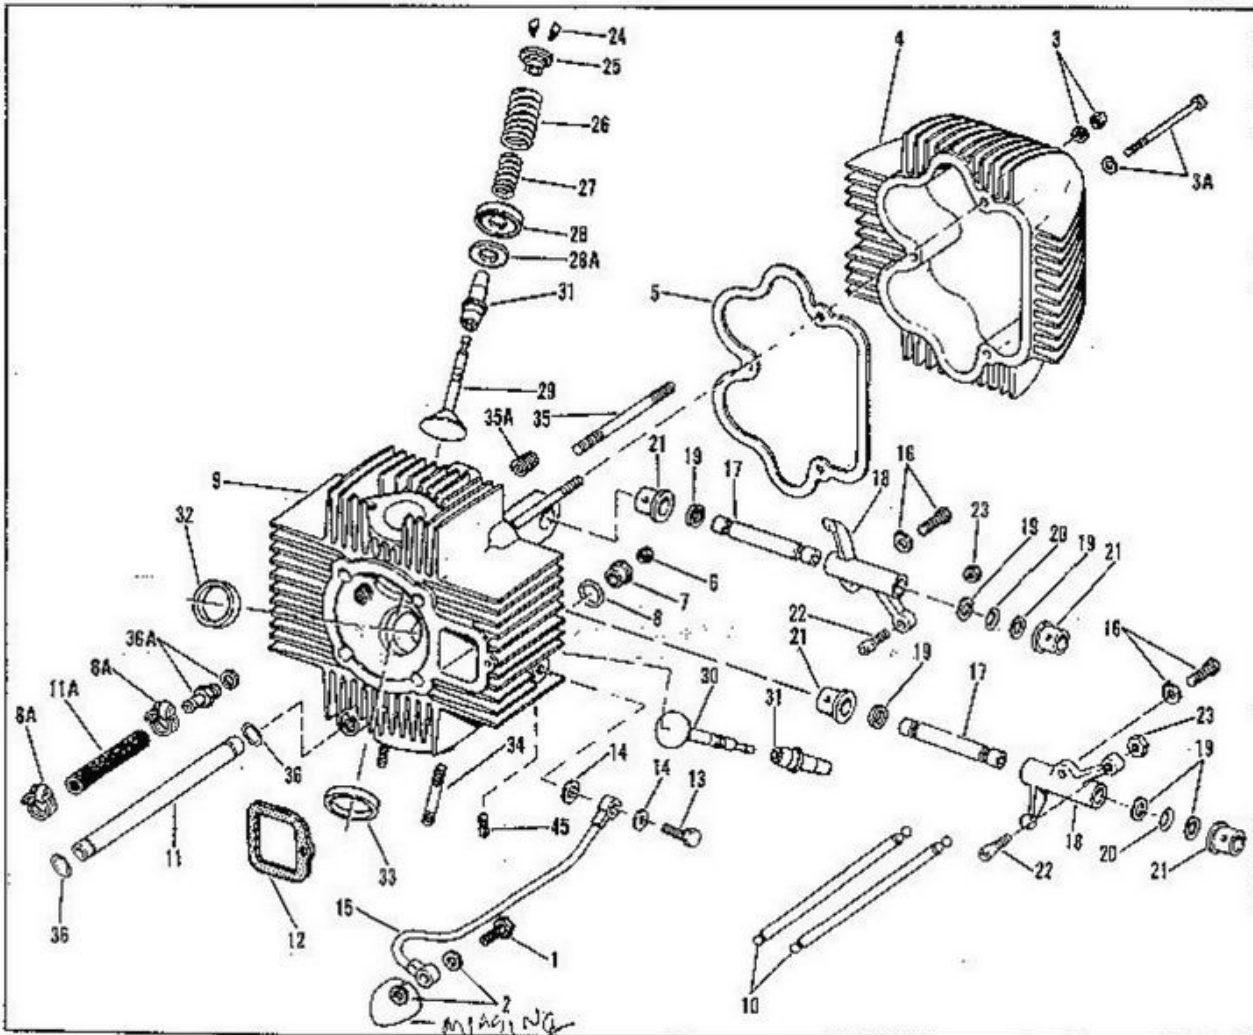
B-12A. 1967-72 Cylinder Head Assembly - Exploded View
